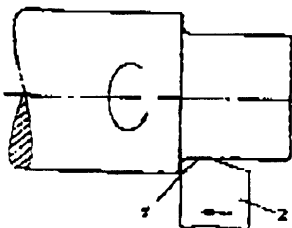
Turning tool with broad-nosed finishing tip produces a better surface finish
